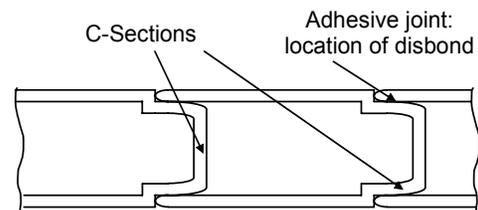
Typical helicopter rotor blade; detail of the blade cross-section indicating the adhesive joining of C-sections
